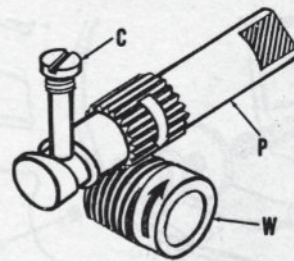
Automatic oil pump worm gear (W) driven by crankshaft turns plunger (P) at 1/20 engine speed. As plunger turns, cam on end of plunger engages cam screw (C) causing the plunger to go back and forth. Flat end of plunger acts as inlet and outlet valve.
